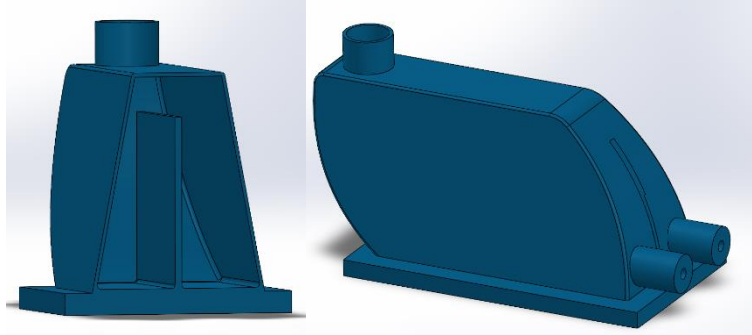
SolidWorks model of the reservoir, including a cutaway view and an isometric view
